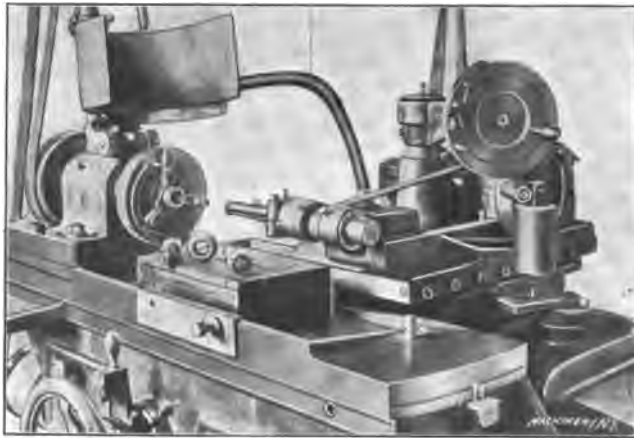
Grinding the Bore of the Cams Concentric with the Cylindrical Surface
